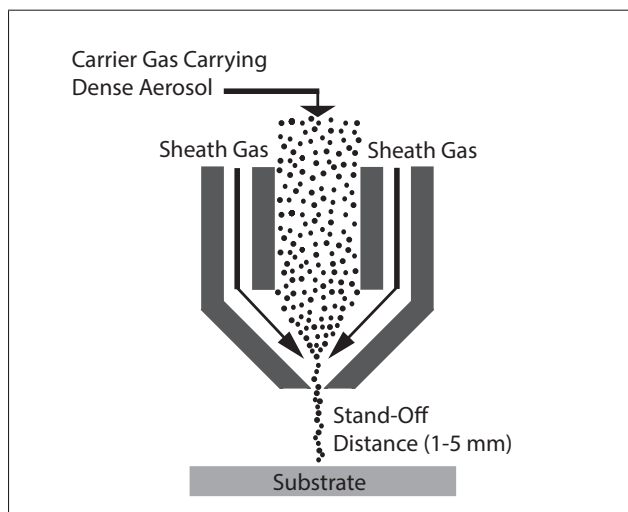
Schematic of the cross-sectional view of the aerosol-jet printing head
